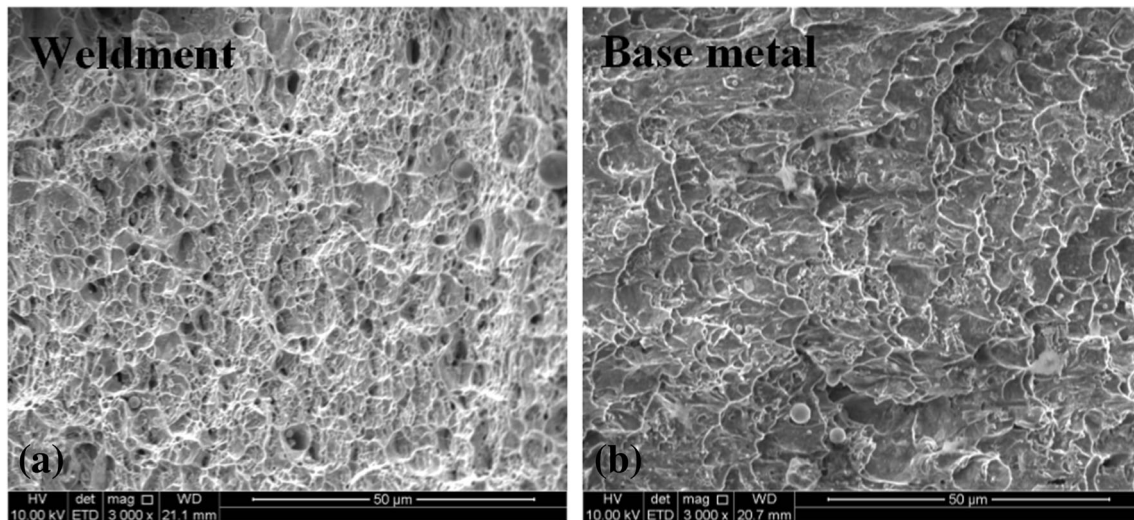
Morphology of the tensile fracture surface. a Weldment. b Base metal
